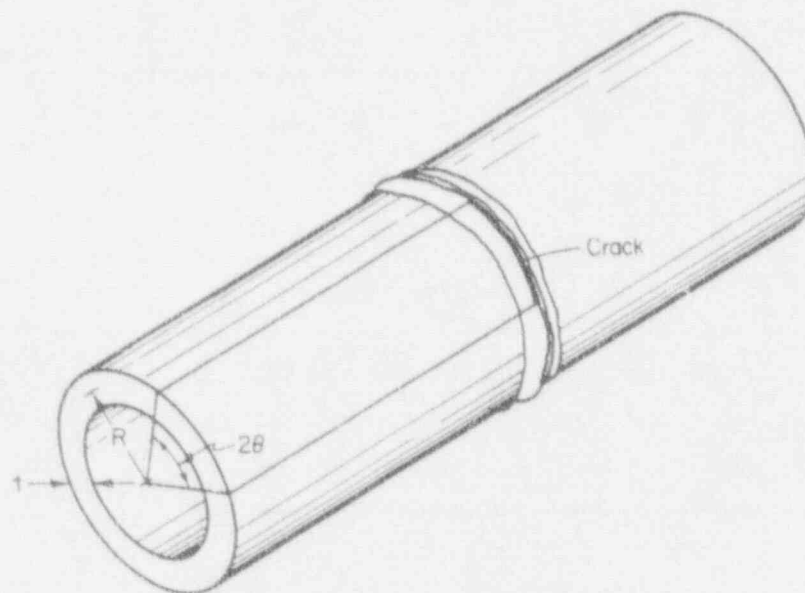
Circumferential crack in a pipe butt weld
